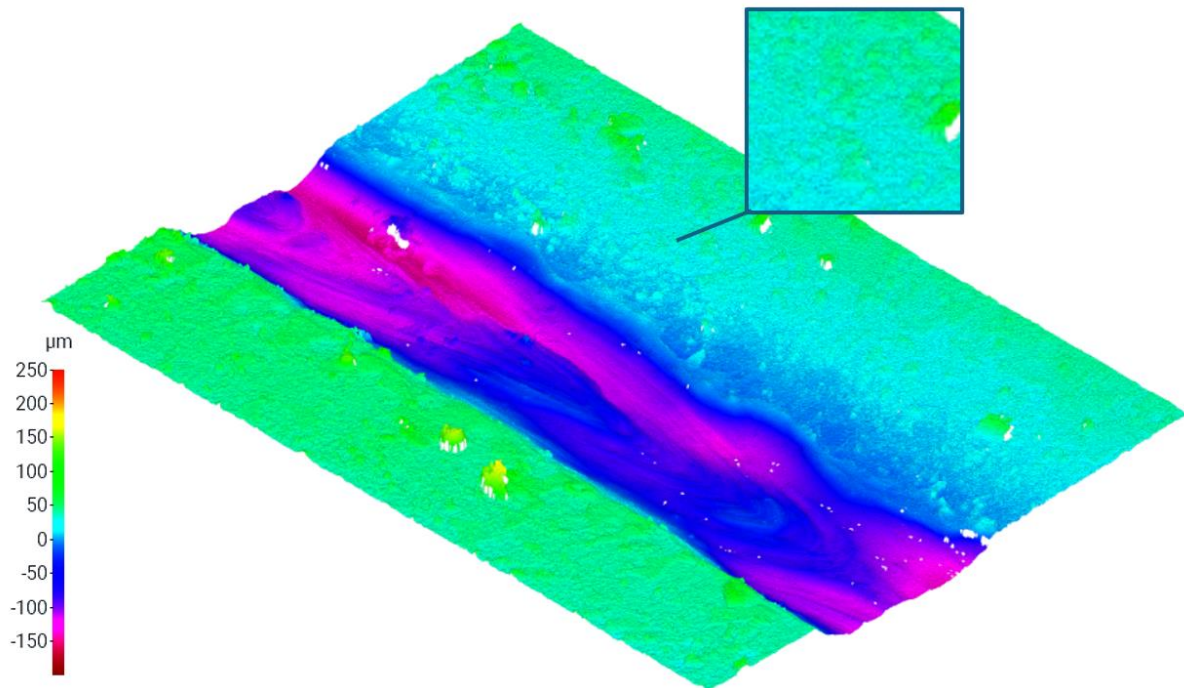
Conventionally cleaned sample surface before welding. The height-colour indicator is on the left.
